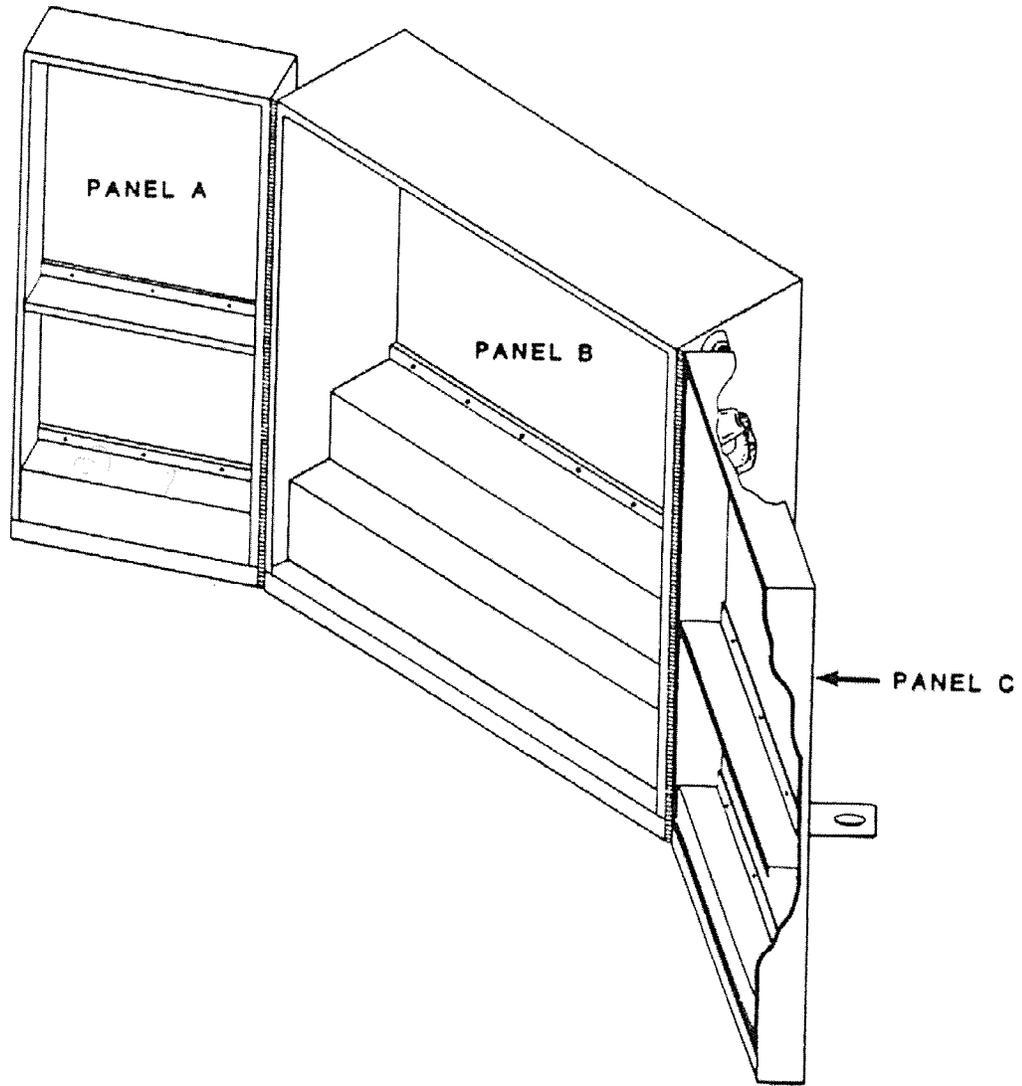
Tool Cabinet, Repair "F" and "G"
